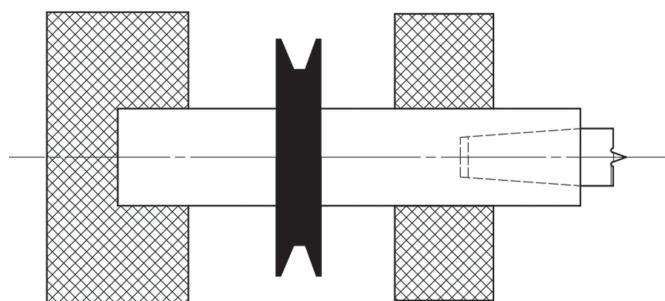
A live spindle consists of a cylindrical part that rotates in its own bearings, and this drives the workpiece through a spur center or a chuck.
